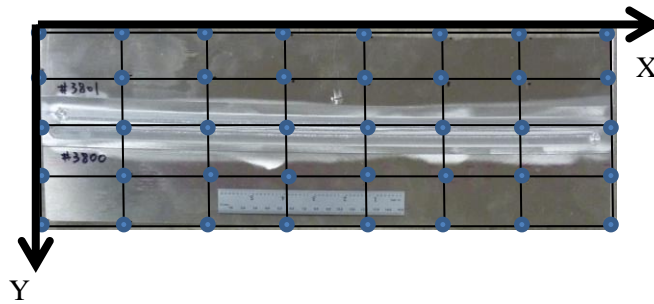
Preparation of welding sheet for distortion measurement
